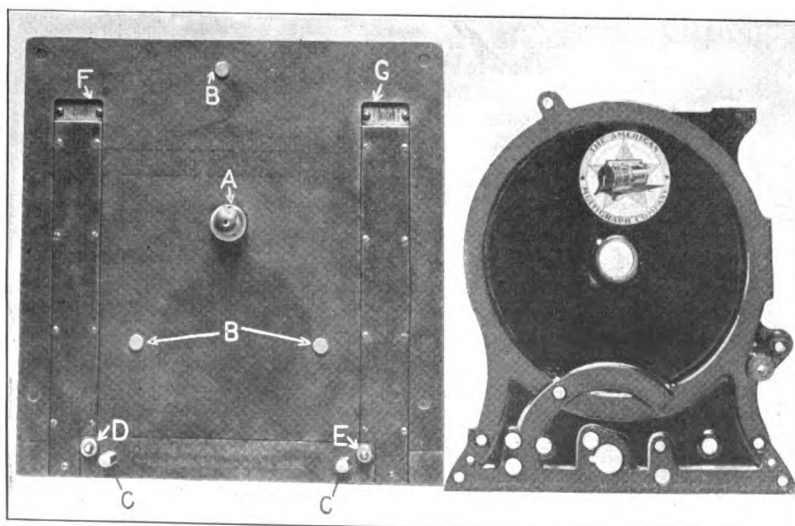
DOUBLE INDICATING FIXTURE FOR SURFACE OF END PLATE WITH LOCATING AND GAGING STUDS
